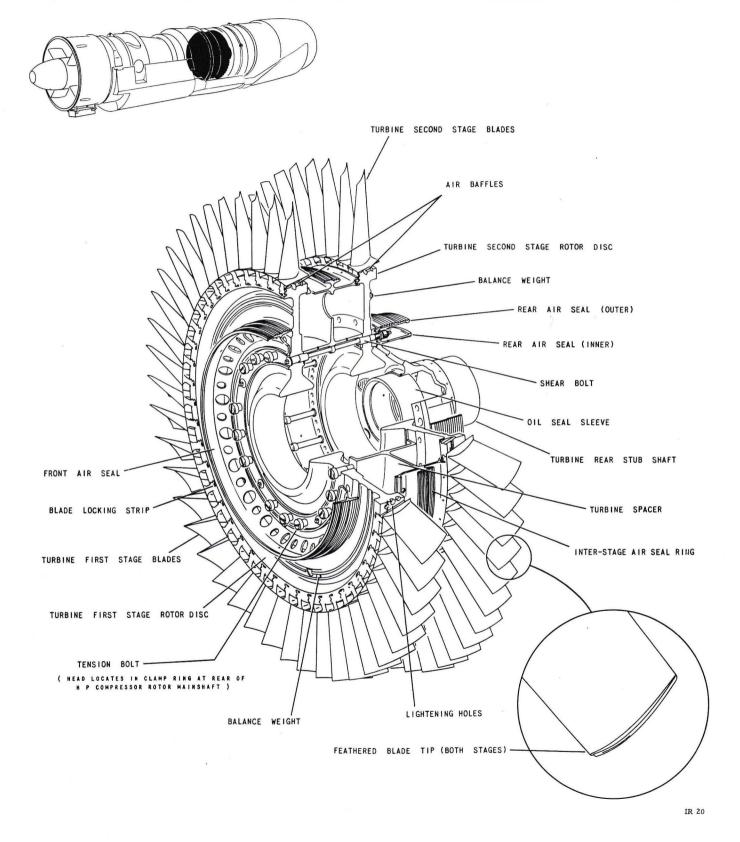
High Pressure Turbine Rotor Assembly
